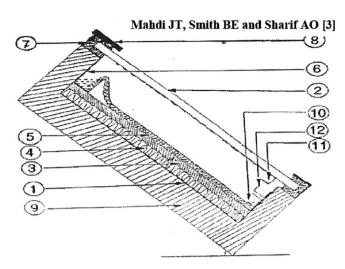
Cross sectional view of the still. (1) Galvanished steel tray, (2) glass cover, (3) support board, (4) polystyrene, (5) charcoal cloth, (6) aluminium channel, (7) rubber gasket, (8) steel strip, (9) Styrofoam, (10) brine gutter, (11) distillate gutter and (12) distillate outlet channel.
